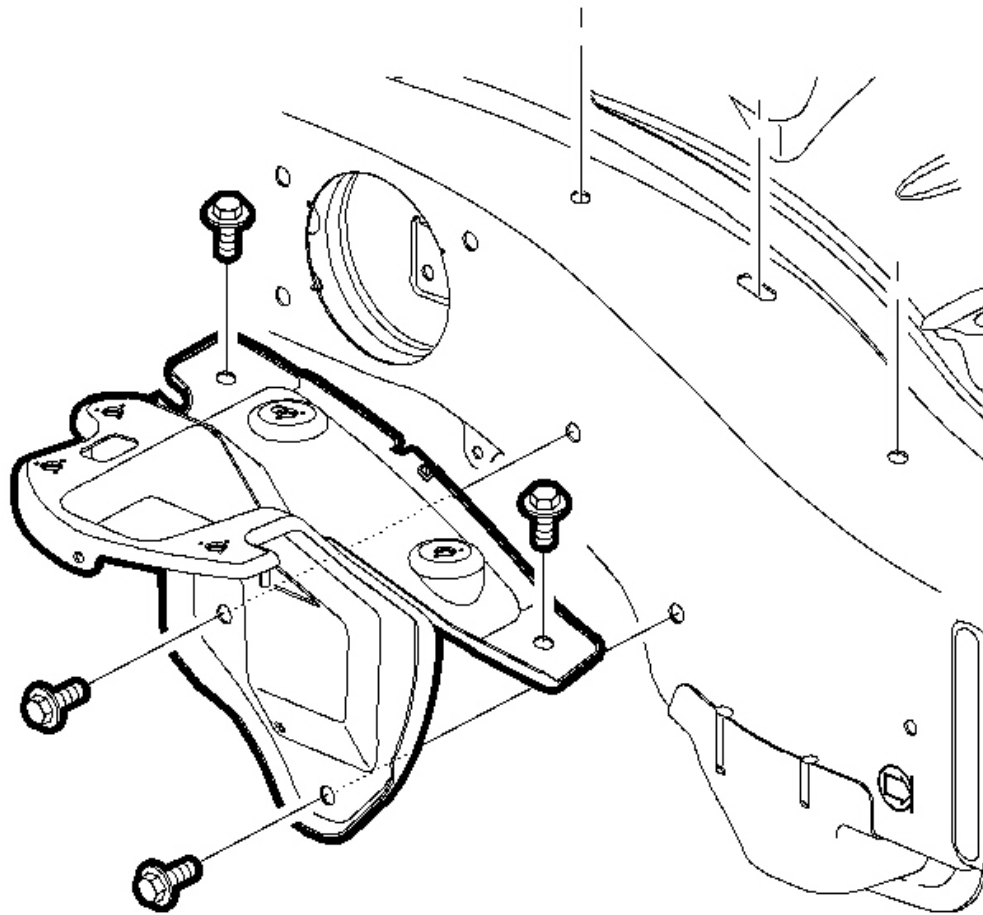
Installing Headlamp Assemblies & Torque Bolts
